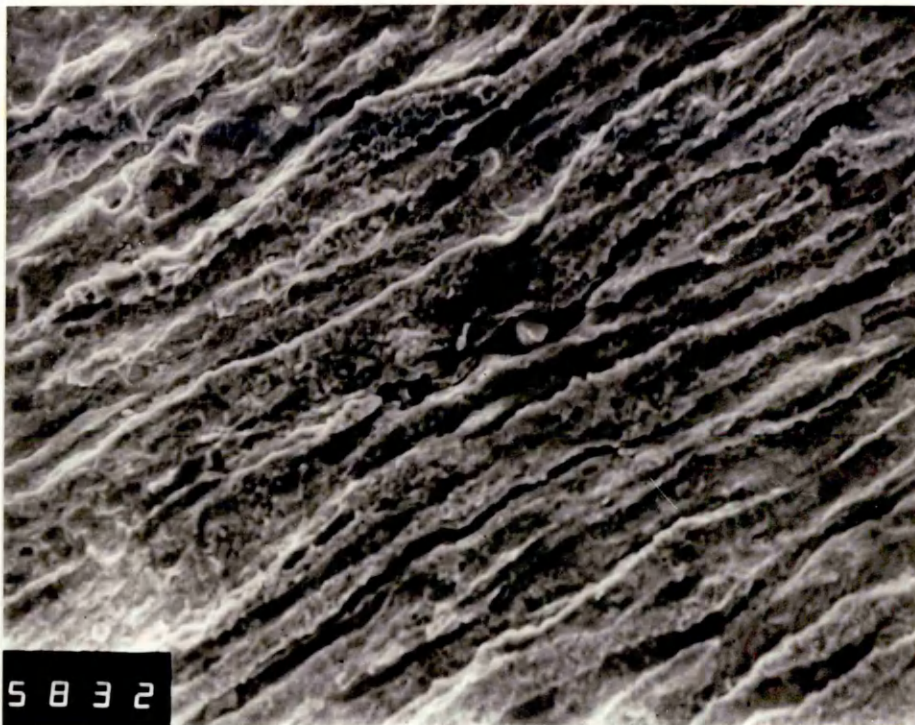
SURFACE FINISH OF MILD STEEL WIRE DRAWN
